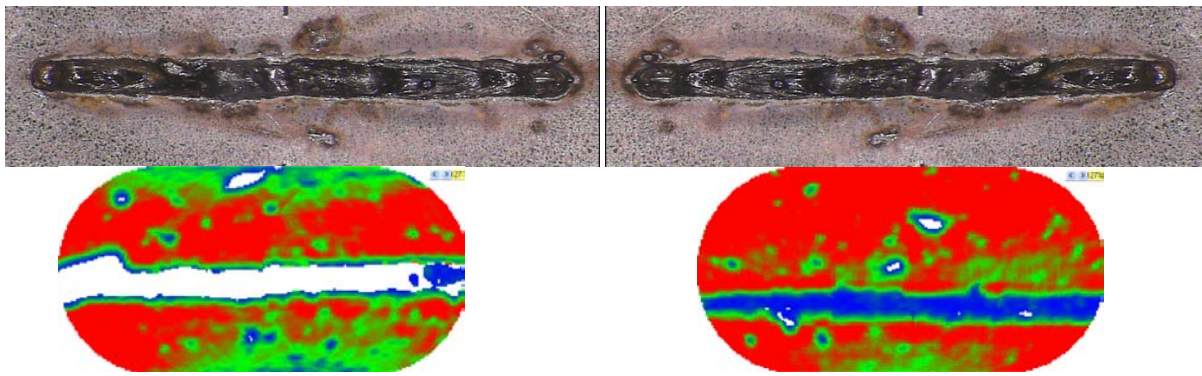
Weld top bead (0mm gap, sample F) and Amstech result from top bead (L) and bottom bead (R)
